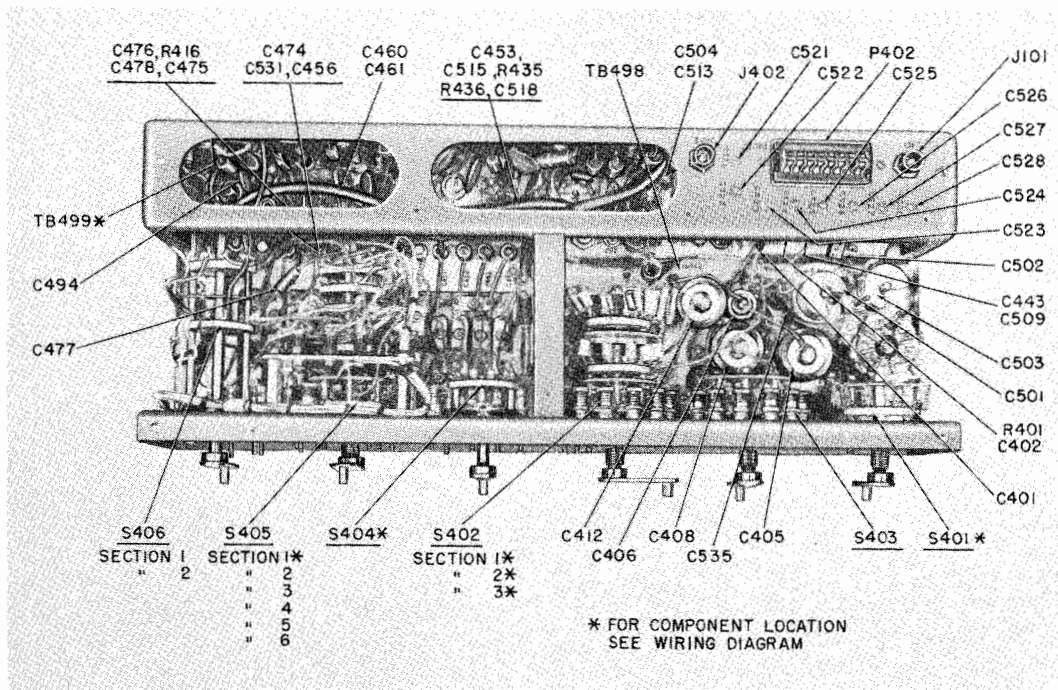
Reference Oscillator and Mixer, Bottom View
